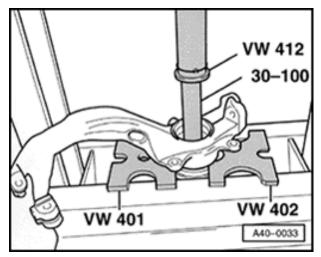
Pressing wheel hub out of wheel bearing housing with 82 mm diameter
